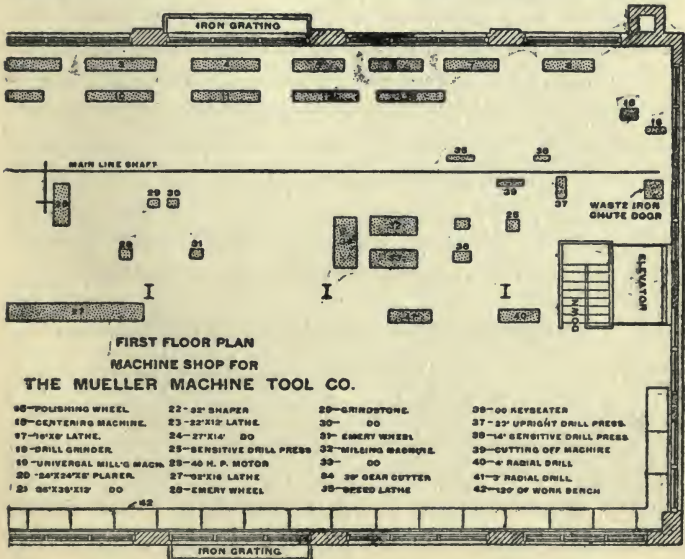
Figure I: In this machine shop of the Mueller Machine Tool Company, floorspace
